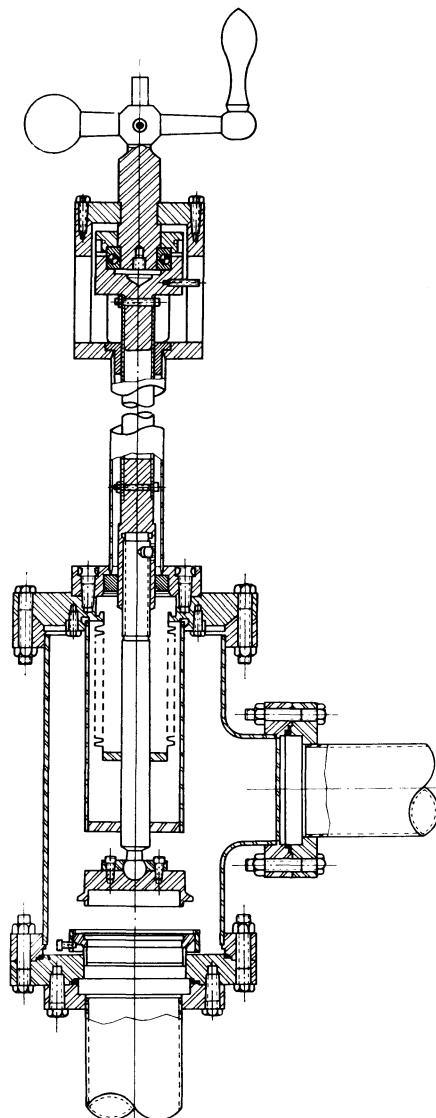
Section through an ultra-high vacuum valve using "Conoseal" joint for its closure. Reproduced from Ullman¹²⁴⁹ (*Courtesy of Pergamon Press*)
